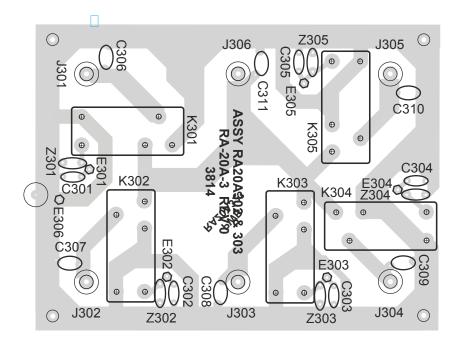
RA20A302 and RA20A303 Assembly component locator.
